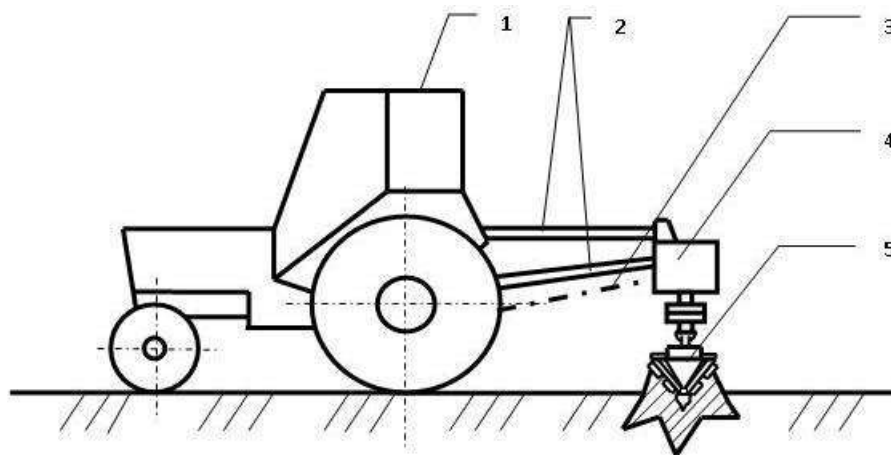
Schematic diagram of the stump grinding machine: 1-tractor; 2-traction system; 3-propeller shaft; 4-gearbox; 5-cone milling machine with liquid filler for stump grinding
